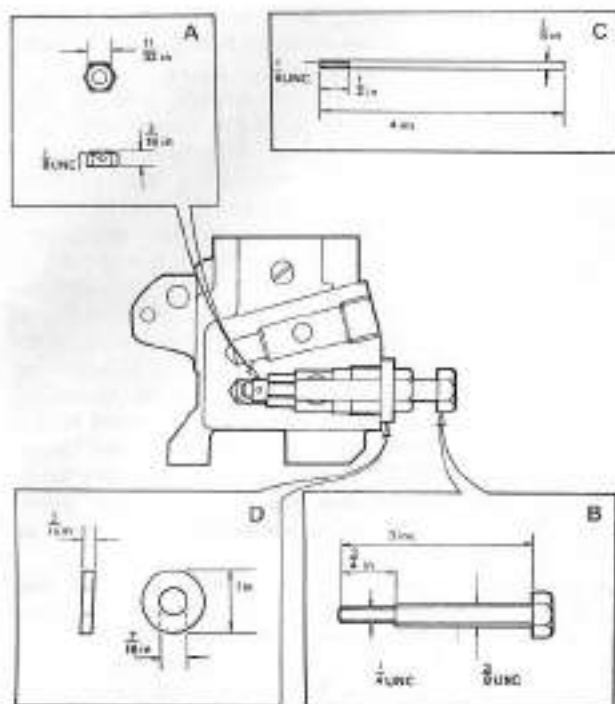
To renew non-return (check) valve seat, a tool can be fabricated to dimensions shown. Cross-sectional drawing of valve body in center view shows tool in position to remove valve seat. Pin (C) is used to position small nut (A) while puller bolt (B) is threaded into nut, then pin is unscrewed from nut. Hold bolt and turn outer (large) nut to remove seat.
